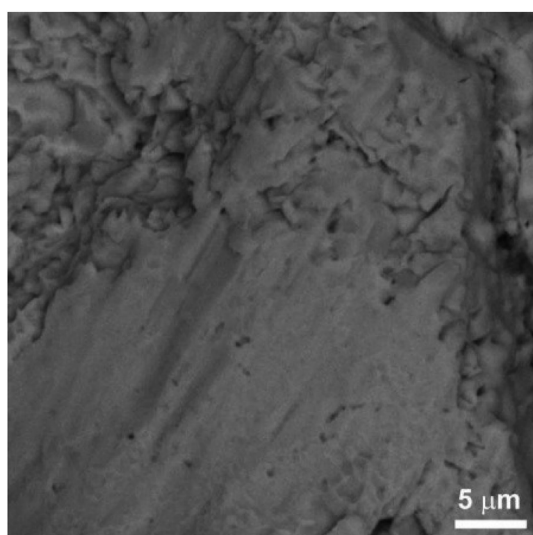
Fragment of the fracture surface with an area of viscous shear deformation.
